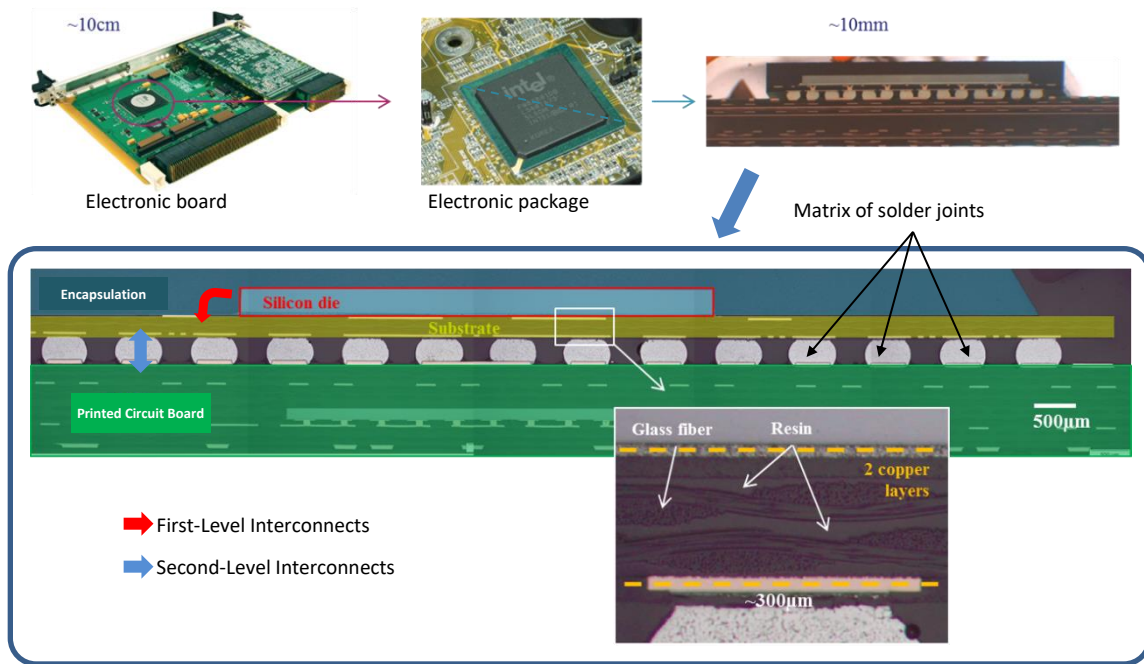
Electronic board assembled with a Ball Grid Array (BGA) Package
